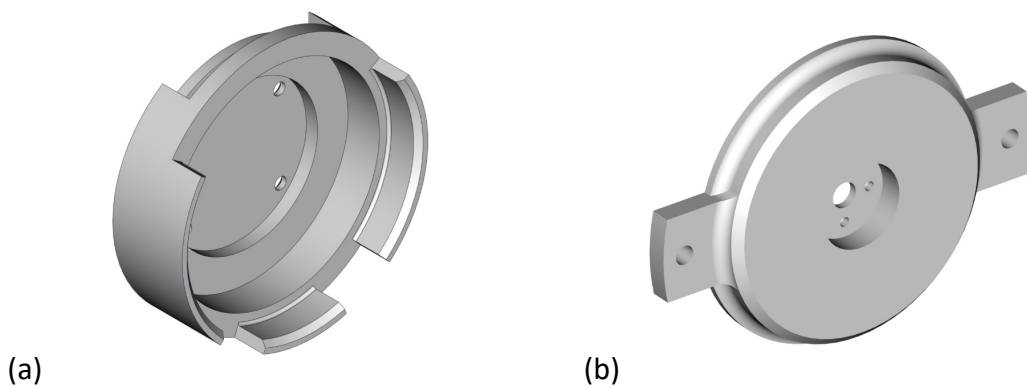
a) Motor position encoder mount. b) Joint position encoder mount.
